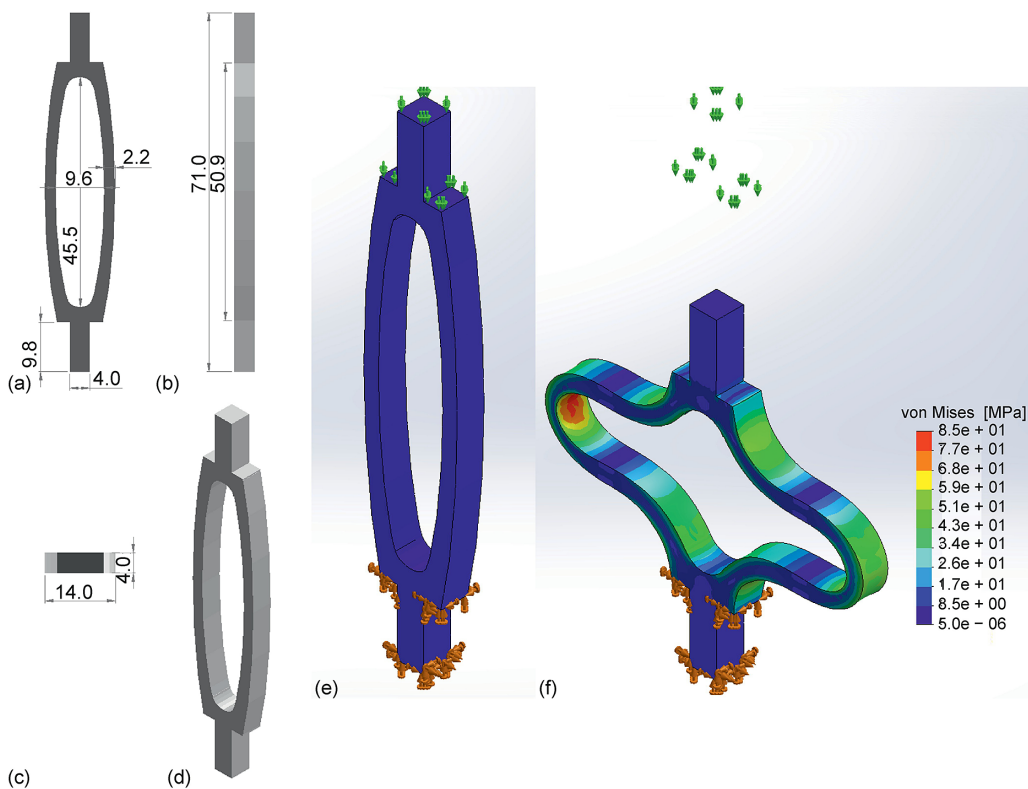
Technical drawing of a unit cell in the perspectives (a) front view, (b) right view, (c) top view, and (d) isometric view. The von Mises stress distribution (e) before and (f) after deformation. In panels (a–c), the dimensions are provided in millimetres.
